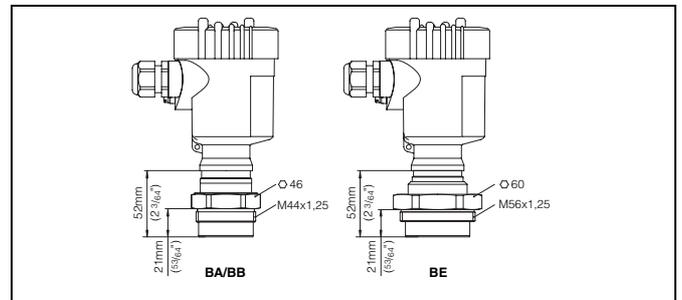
VEGABAR 64, threaded fitting for paper industry
